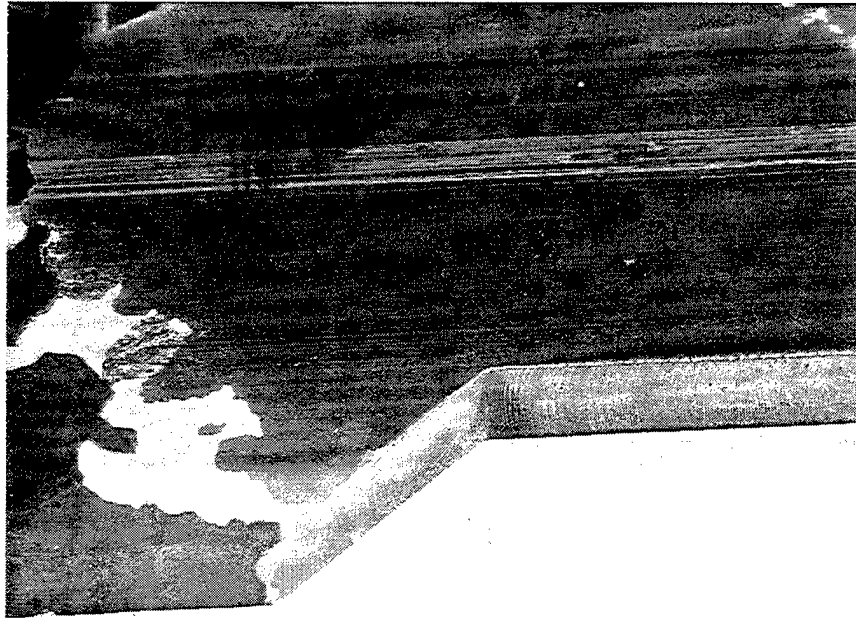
A close-up view of the machined angular notch with a sharp corner in the outer splice angle with no crack. Note the machining of the edge from the angle leg. Magnification: 1 1/3x.
